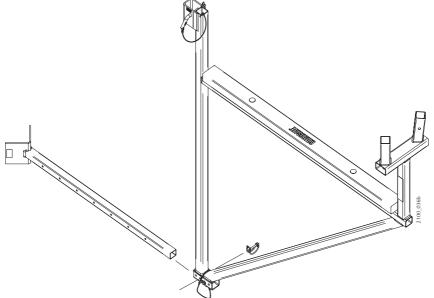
Assembly of Corner Telescope Arm on Corner Platform
